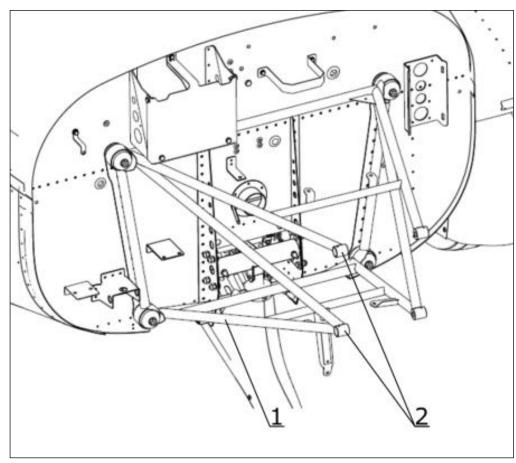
Engine Mount Attachment to the Engine and Firewall
